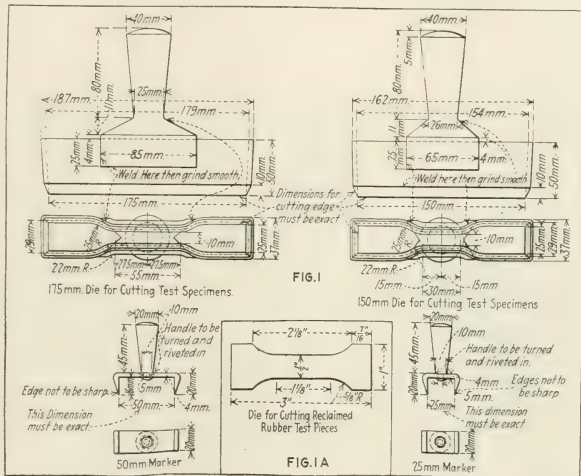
STANDARD DIES FOR CUTTING AND GAGING TEST PIECES. FIG. 1-A. STANDARD DIE FOR CUTTING SAMPLES OF VULCANIZED RECLAIMED RUBBER.
